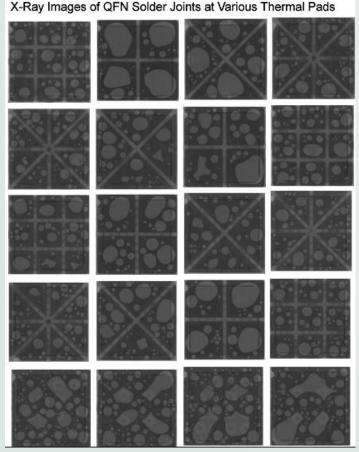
Examples of X-ray image of QFN solder joints at various thermal pads with 50% paste printed.
